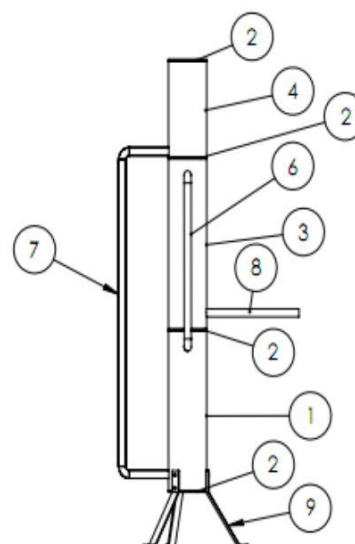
Figure of the first CAD drawing, (1) Water drum, (2) Flanges, (3) Superheating drum, (4) Preheating drum, (5) Safety Valve (not shown in this view), (6) (7) Water circuit lines, (8) Steam outlet pipe, (9) Legs
